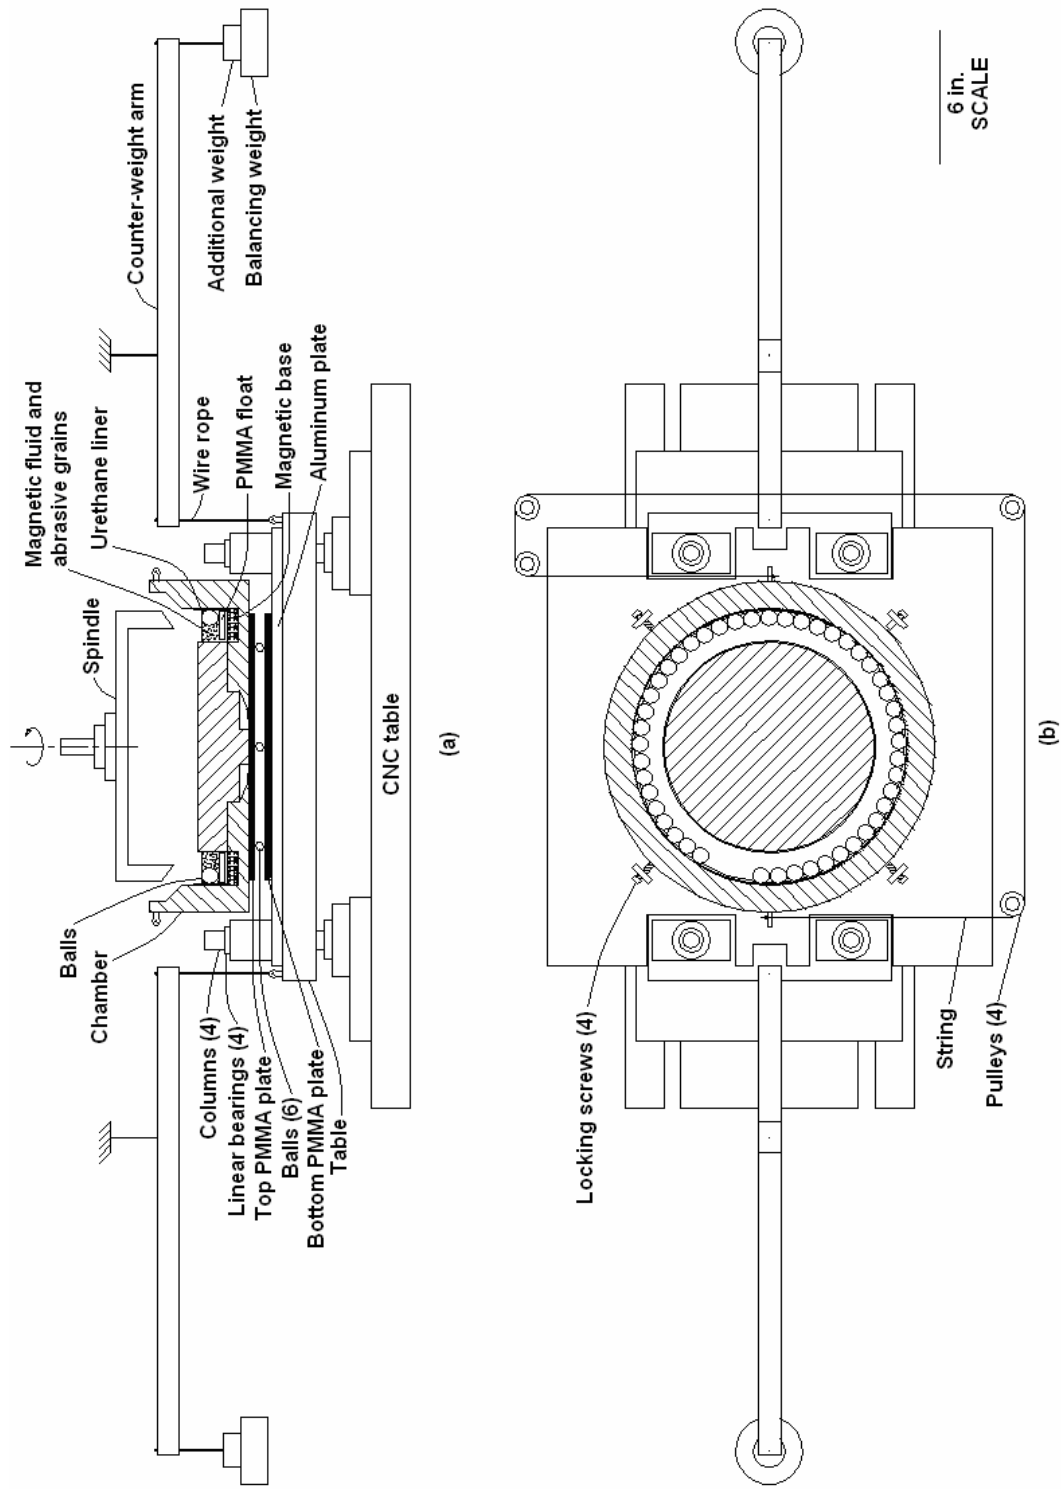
Schematic of the experimental set-up (a) front view (b) top view
